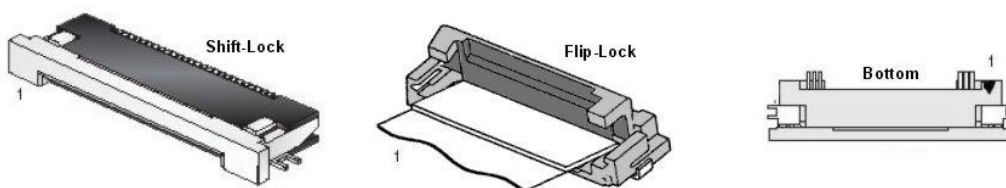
phyCAM-P FFC-connector types (top views and solder side – examples)
